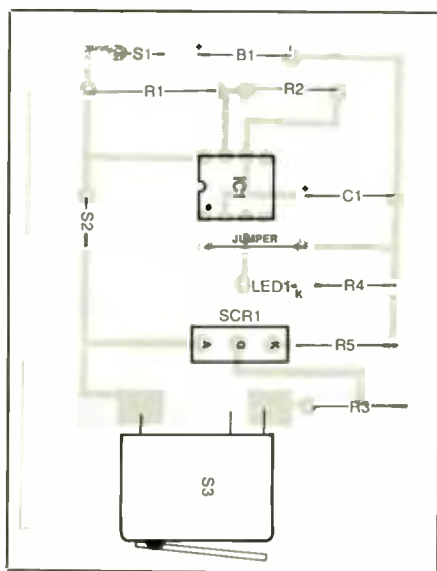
Wiring guide for pc board. Use this as a rough guide to component layout if project is assembled on perforated board.
